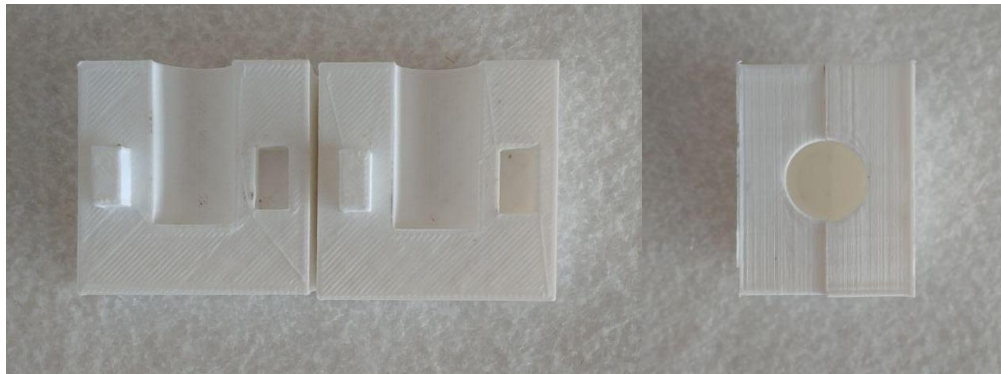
PLA 3D printed mould used for fresh samples
